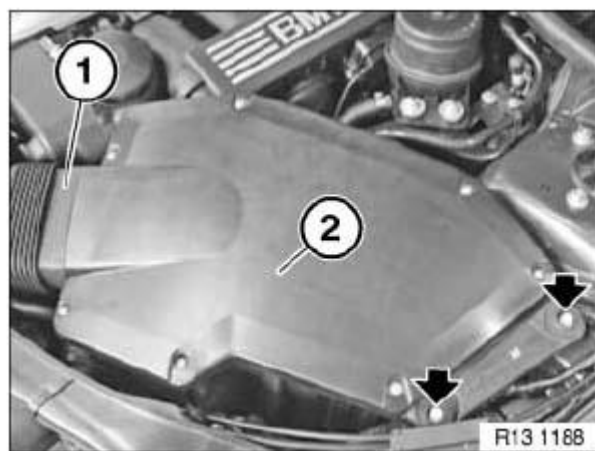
Identifying Filter Housing And Air Intake Hose (3-Series)
